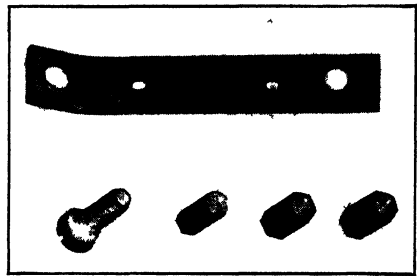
Projection-welded silver contacts. (Courtesy General Electric Company.)
